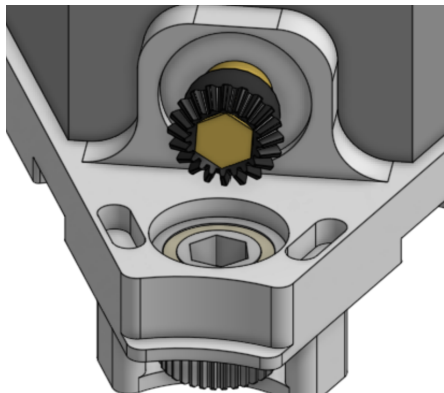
Bevel gear glued onto the auger end cap's shaft.
